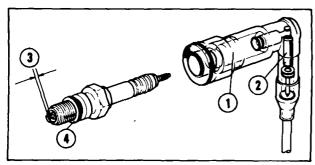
① Plug cap ③ 0.6~0.7 mm (0.024~0.028 in.)
